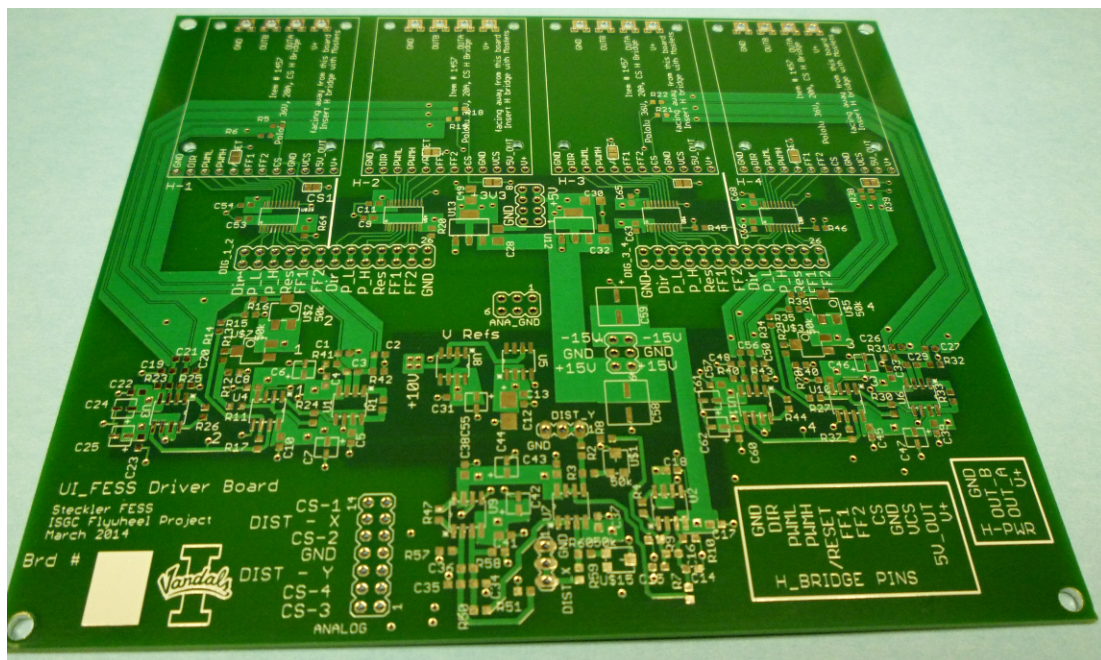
The Unpopulated UIFESS Driver PCB Version 2 PCB
